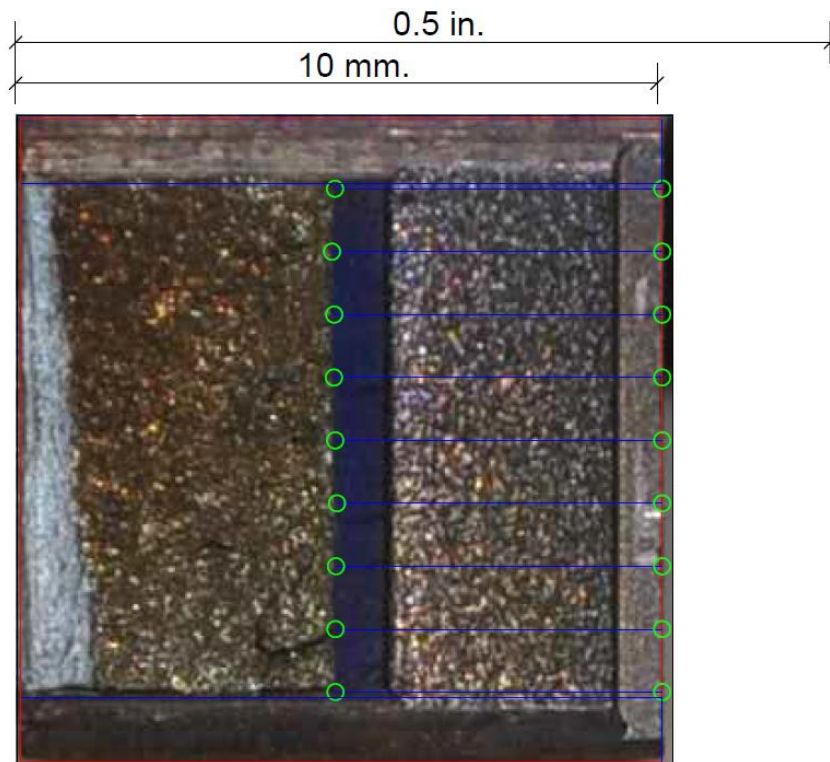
Specimen D31' Fracture Surface
